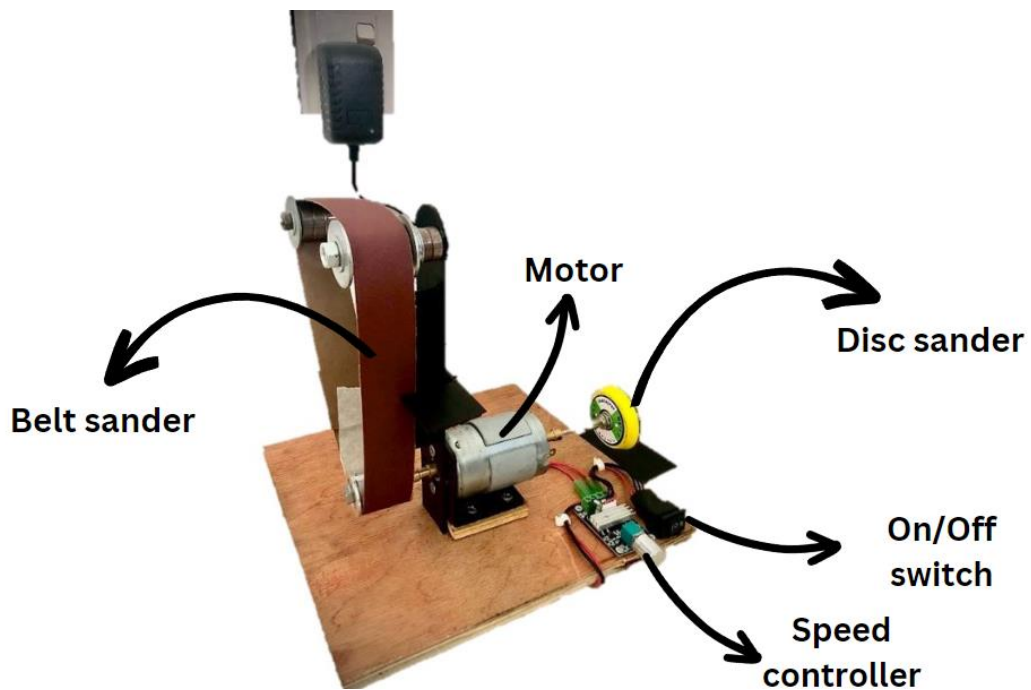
The isometric view of the fabricated Tabletop Belt Sander Machine
